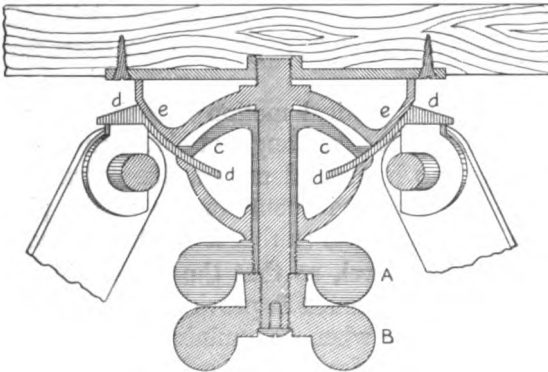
JOHNSON PLANE-TABLE HEAD.
